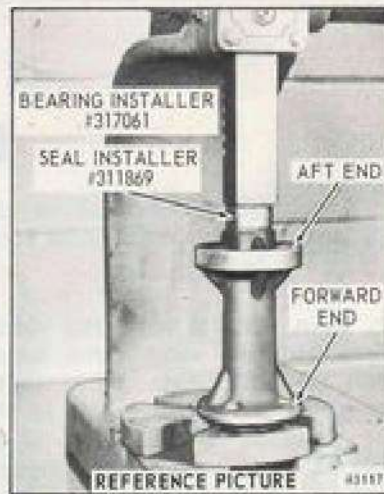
Installing Gearcase Head Aft Bearing and Seals
